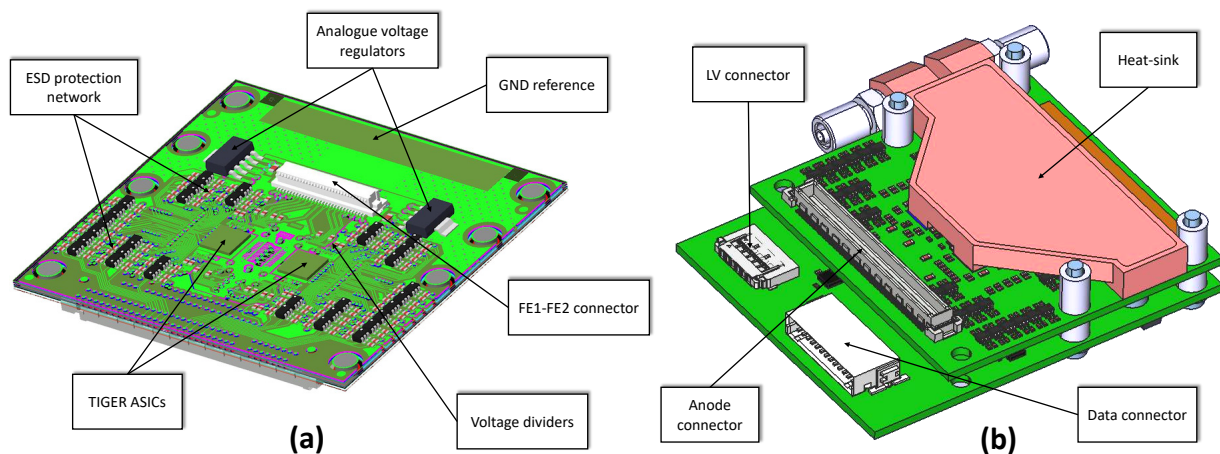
Front-end board for the CGEM-IT inner layer: (a) top-side routing on FE1 and (b) FE1-FE2 assembly with copper heat-sink [23].
